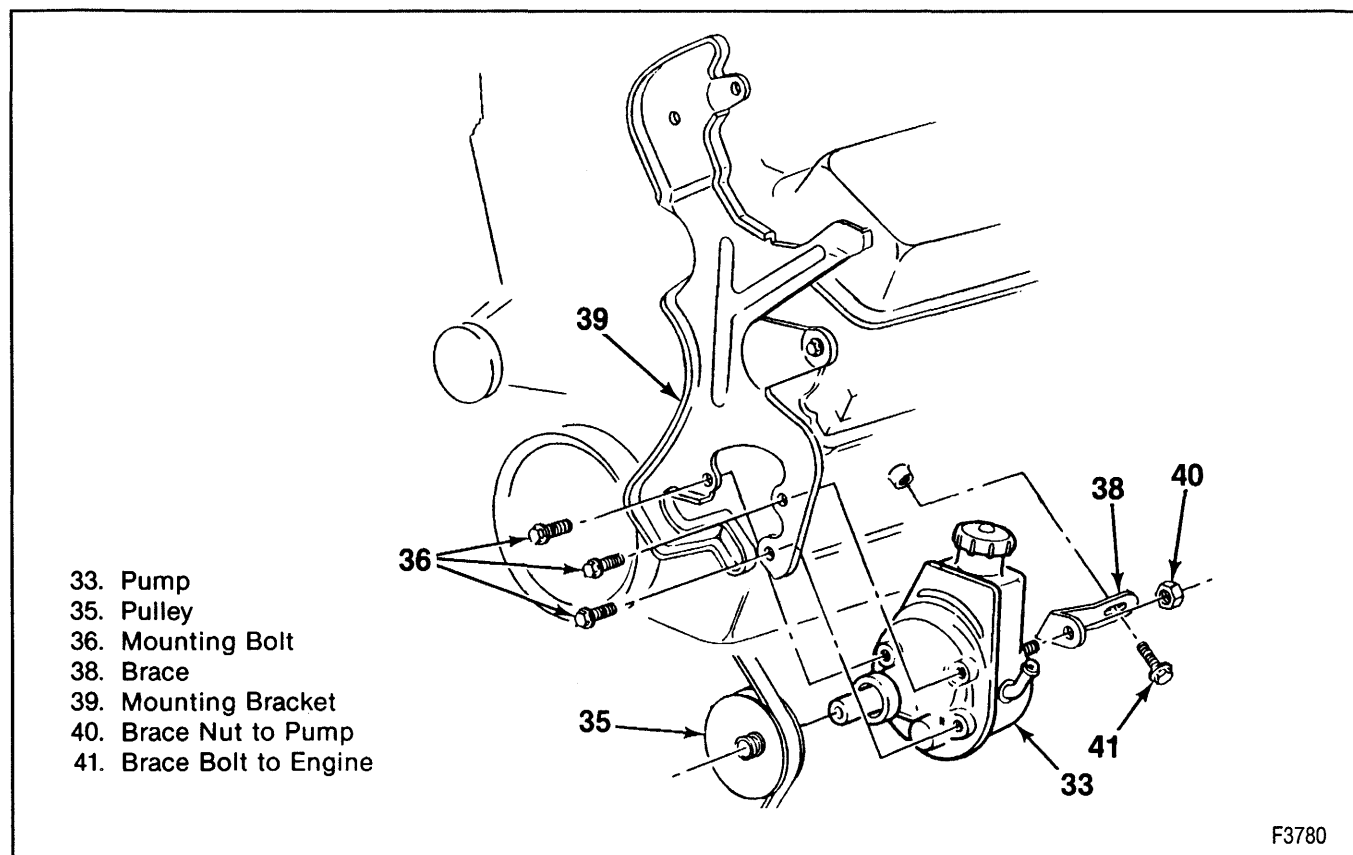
Power Steering Pump Mounting (7.4L Engines)
